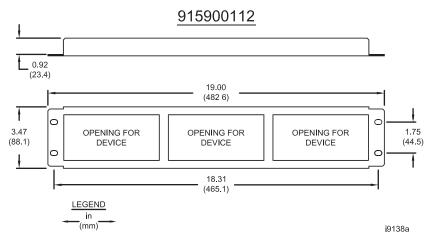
SEL-9510 Three-Opening Panel Cutout Dimension Drawing
